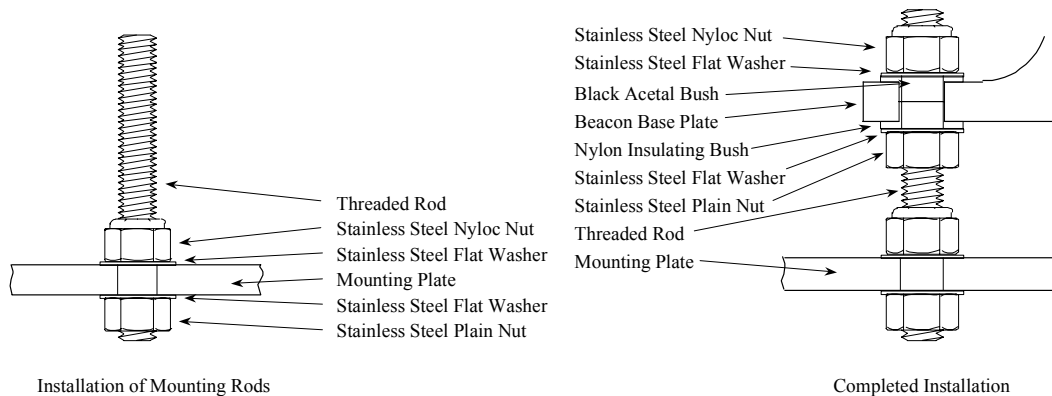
Mounting the VRB-25 Rotating Beacon
